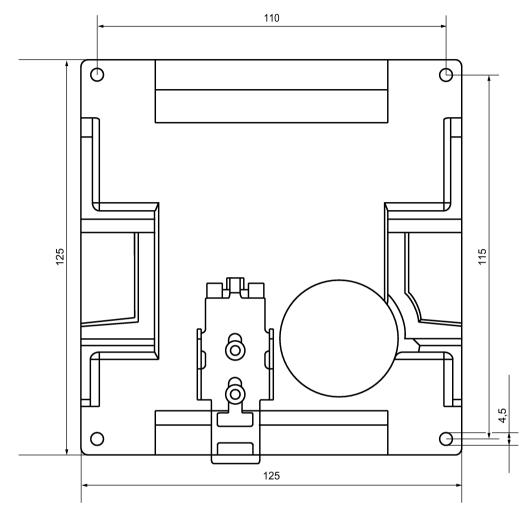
Dimension drawing, rear of the SCALANCE X116, X112-2
